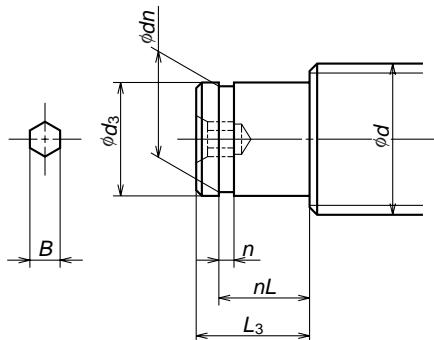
Shaft end configuration of rolled ball screw (opposite to the drive side)
